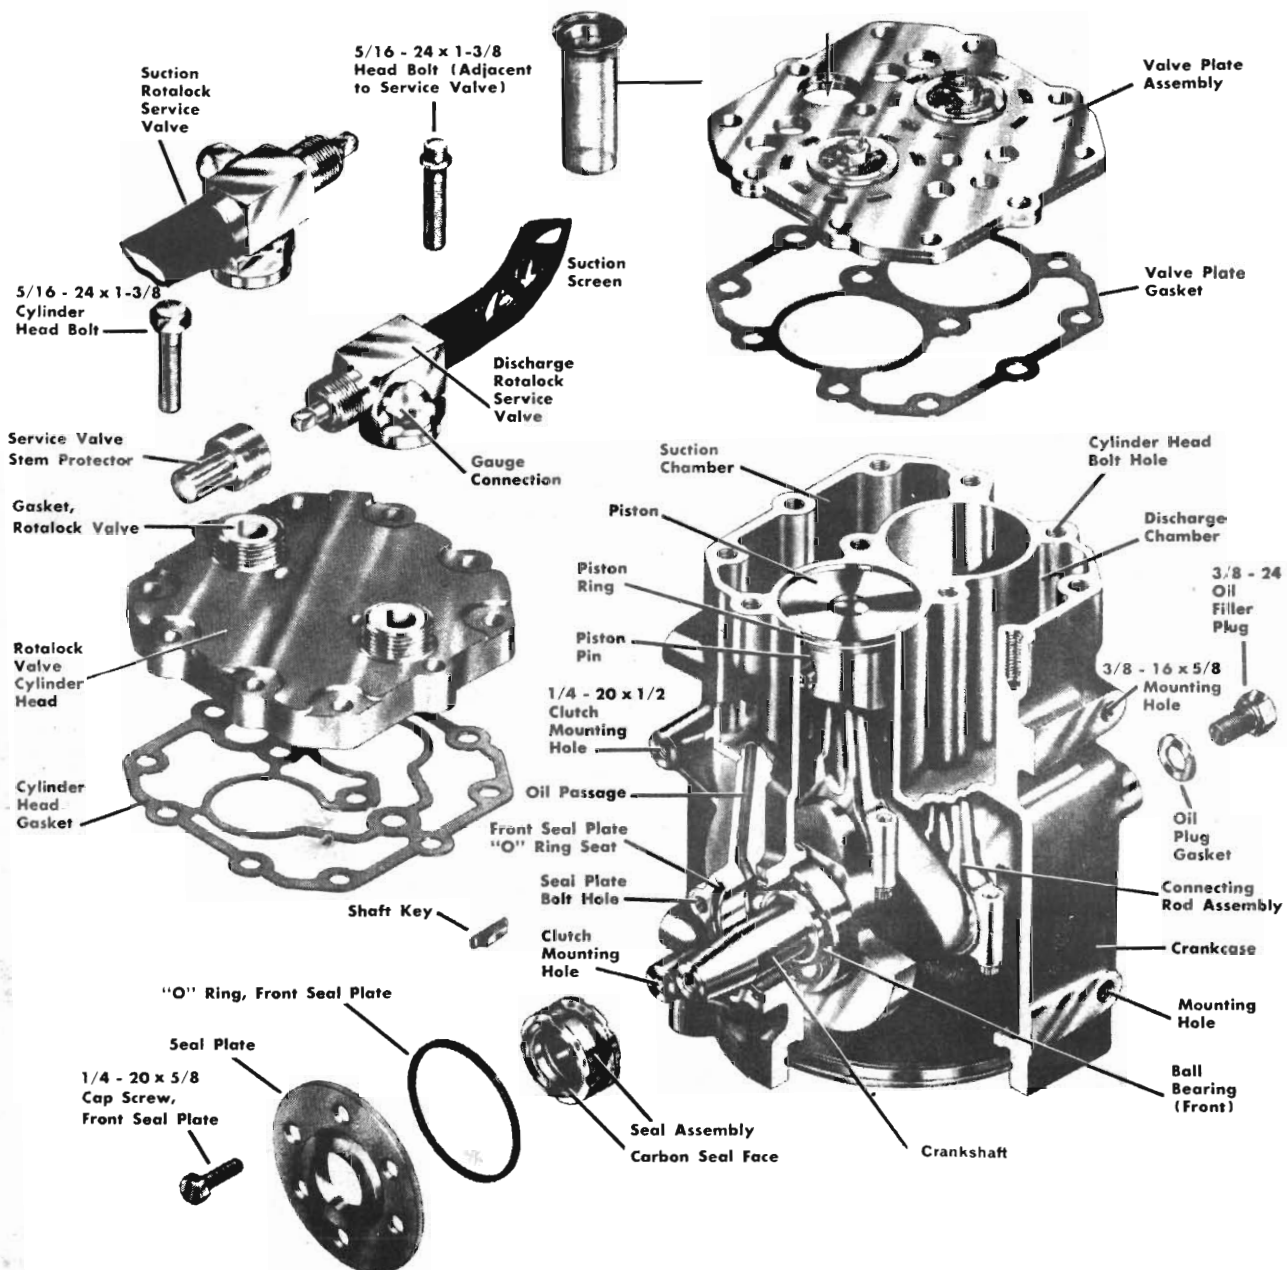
Tecumseh A.C. Compressor Components (disassembled view)
